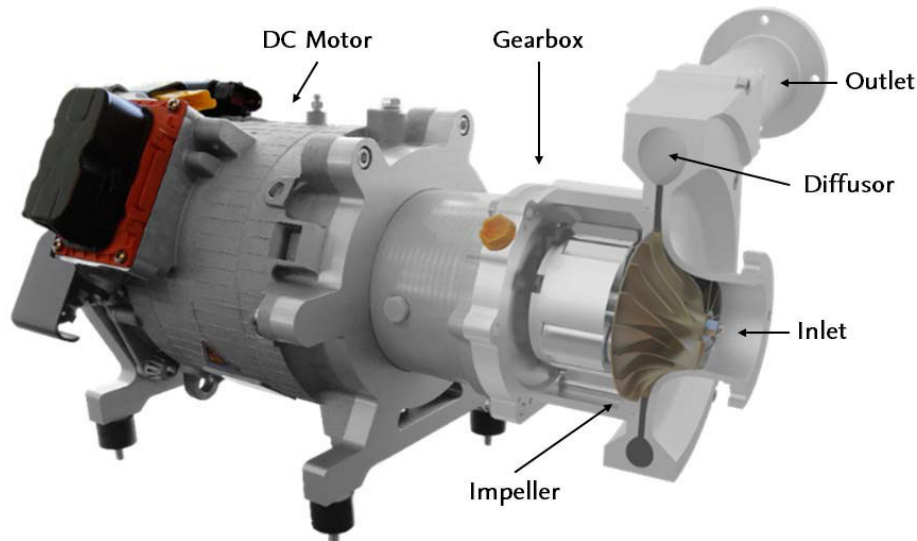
Section view through the prototype of the turbo compressor (Bantle, 2017)
